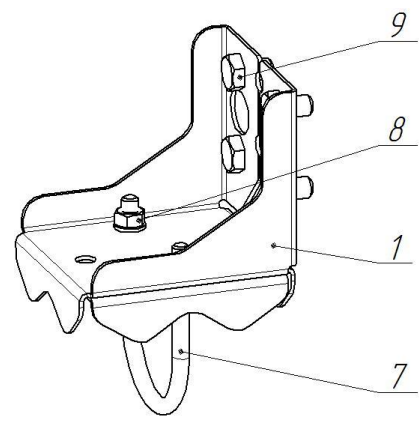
Steel corner bracket. Mounting kit type 2
